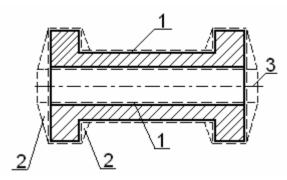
Drawing of casting: 1 – machining and shrinkage allowance; 2 – pattern tapers; 3 – mould opening area
